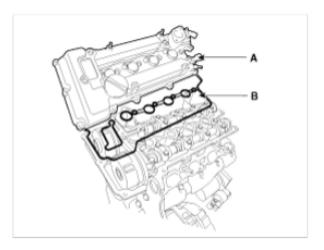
Identifying Cylinder Head Cover And Gaskets Courtesy of HYUNDAI MOTOR AMERICA
